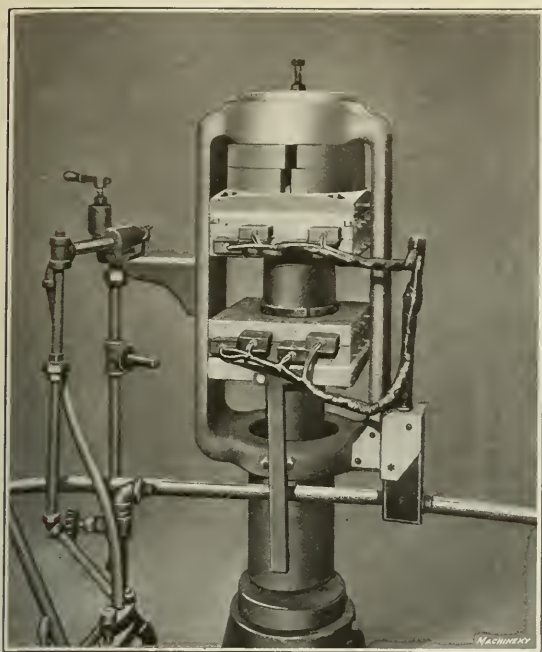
Close View of Press with Magnesia Covering removed to show Wiring and Heating Units
